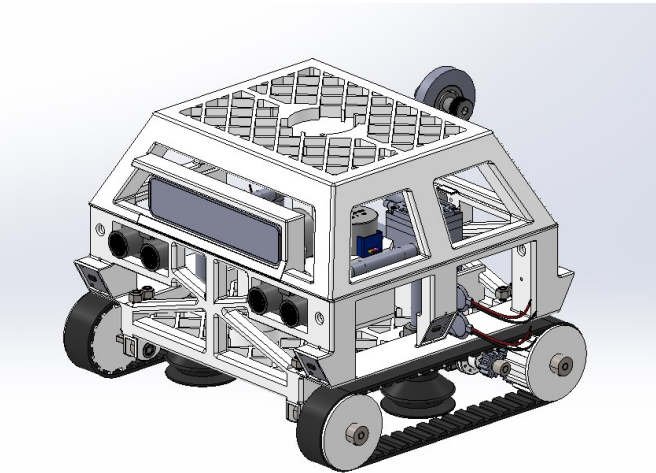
Full robot CAD assembly in SOLIDWORKS.
